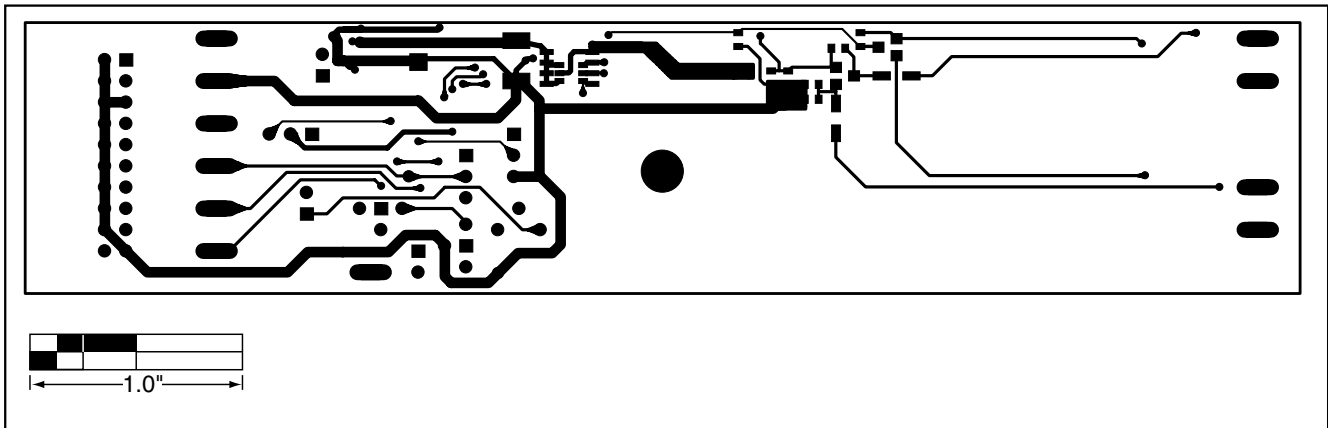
MAX1895 EV Kit PC Board Layout—Solder Side
